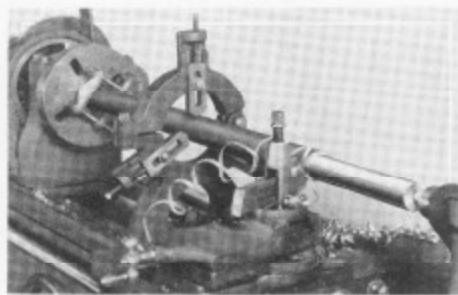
Turning a Drive Shaft Supported by a Center Rest
